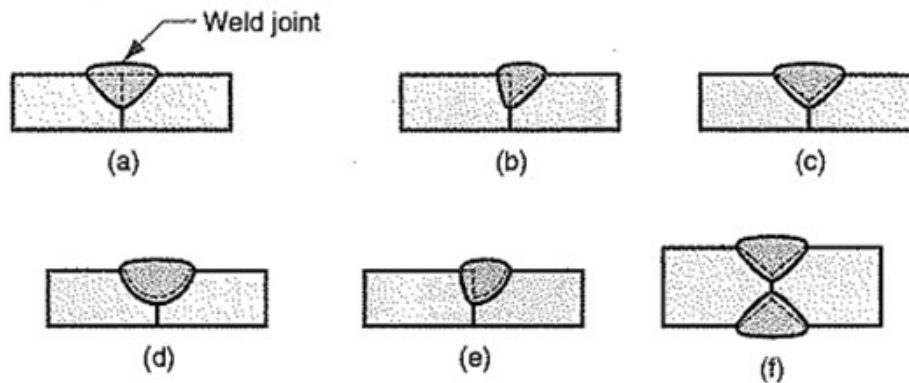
Some typical groove welds: (a) square groove weld, one side; (b) single bevel groove weld; (c) single V-groove weld; (d) single U-groove weld; (e) single J-groove weld; (f) double V-groove weld for thicker sections. Dashed lines show the original part edges.
